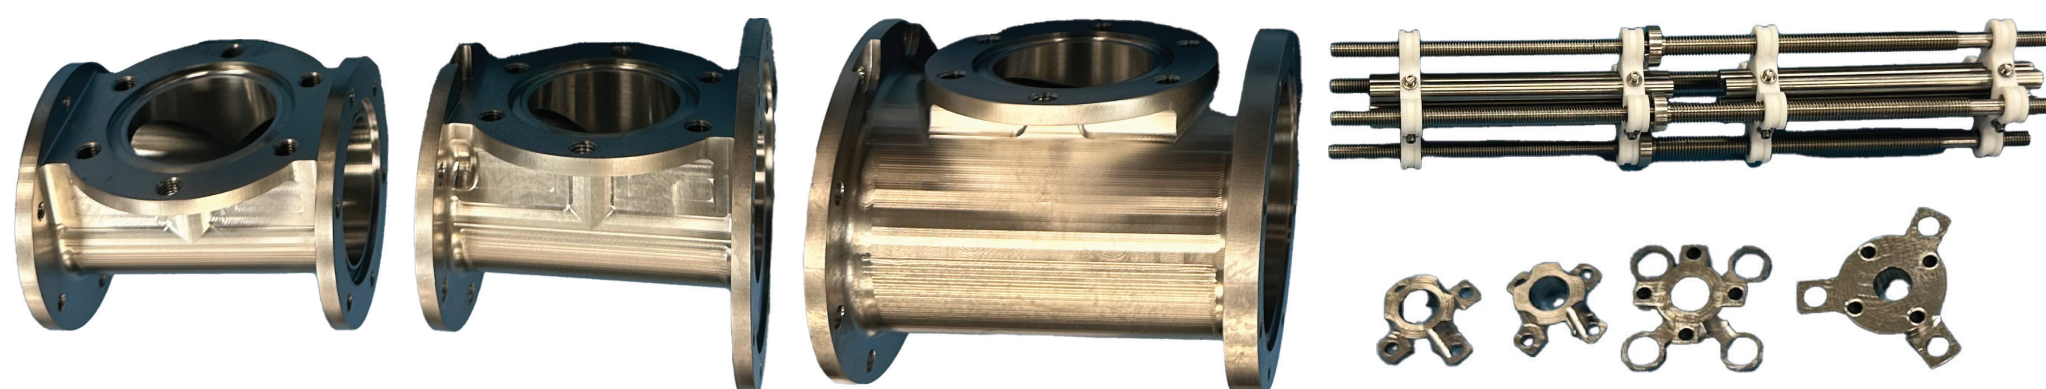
Selection of manufactured and available brassboard SCHAN-QITMS parts
